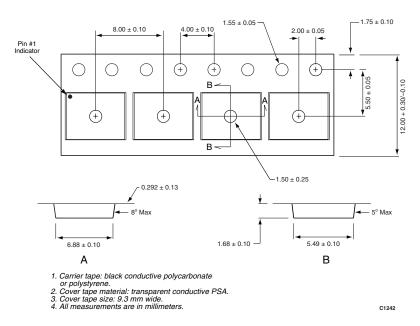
CX65002 8-Pin SOIC Tape and Reel Dimensions
